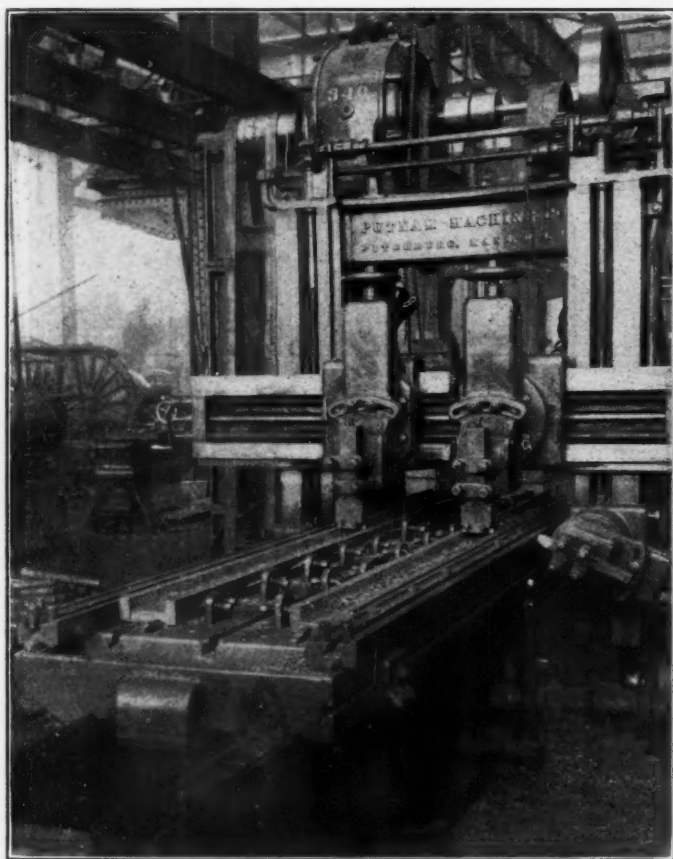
Planing the Inner Sides of Flanges and Face of Shoes and Wedges.
